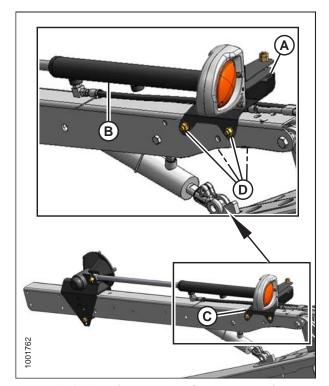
Left Reel Arm Cylinder in Aft Position
